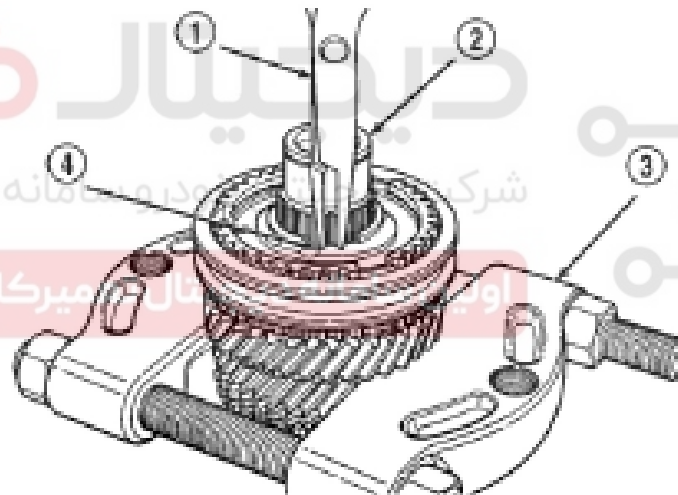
Disassembly of snap ring for the fifth synchronizer and cover
